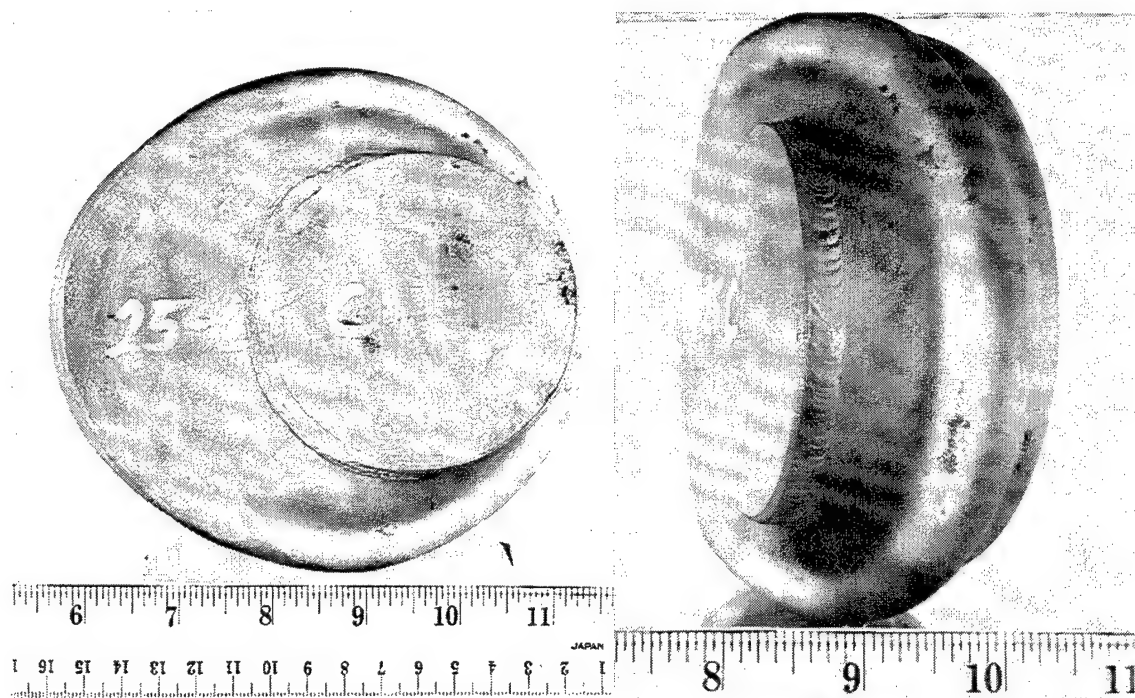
The (a) top and (b) side views of the can assembly after the first forging run for Ti-12Al-38Nb.
